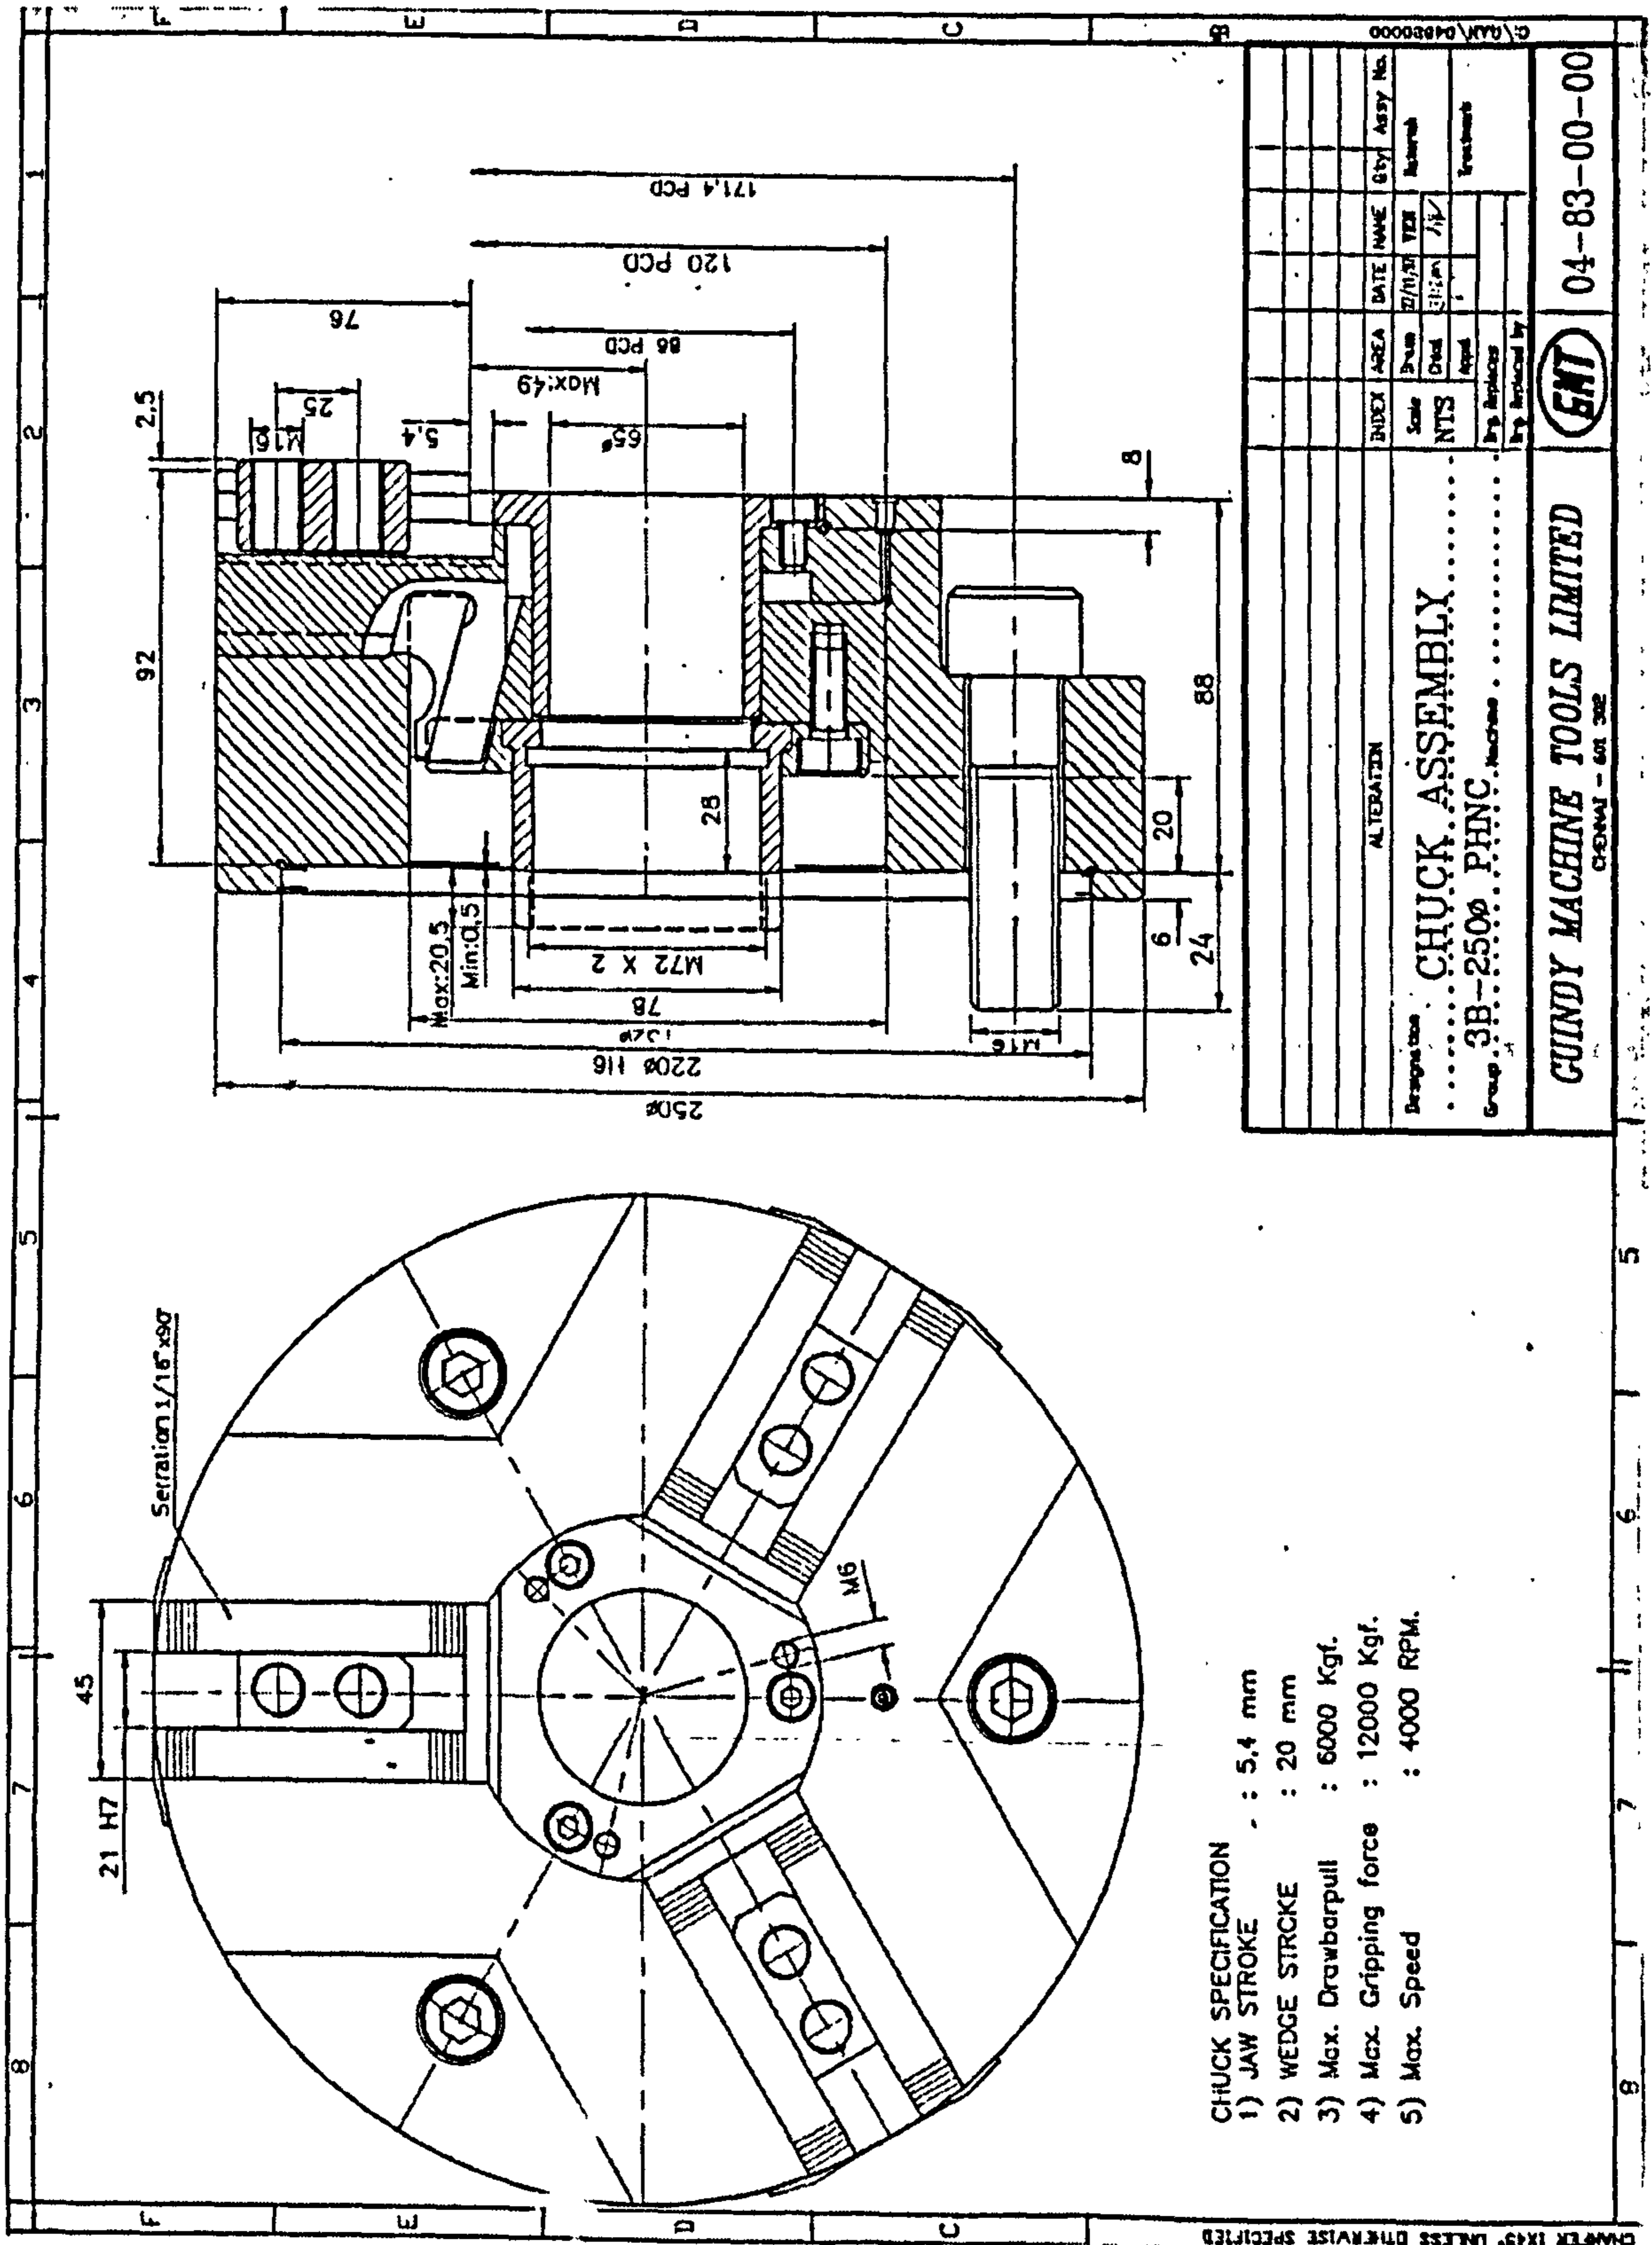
GMT Chuck Assembly – Example Manufacturing Drawing
